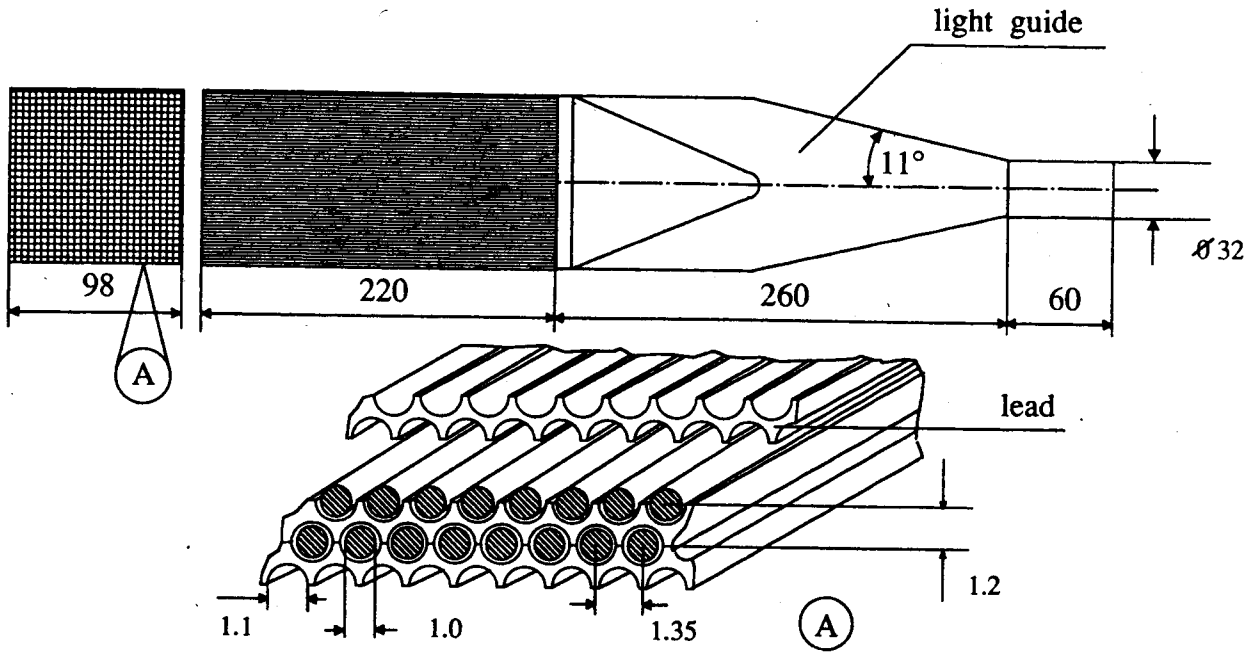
Assembly of grooved lead foils and scintillating fibers. All dimensions are in millimeters.
